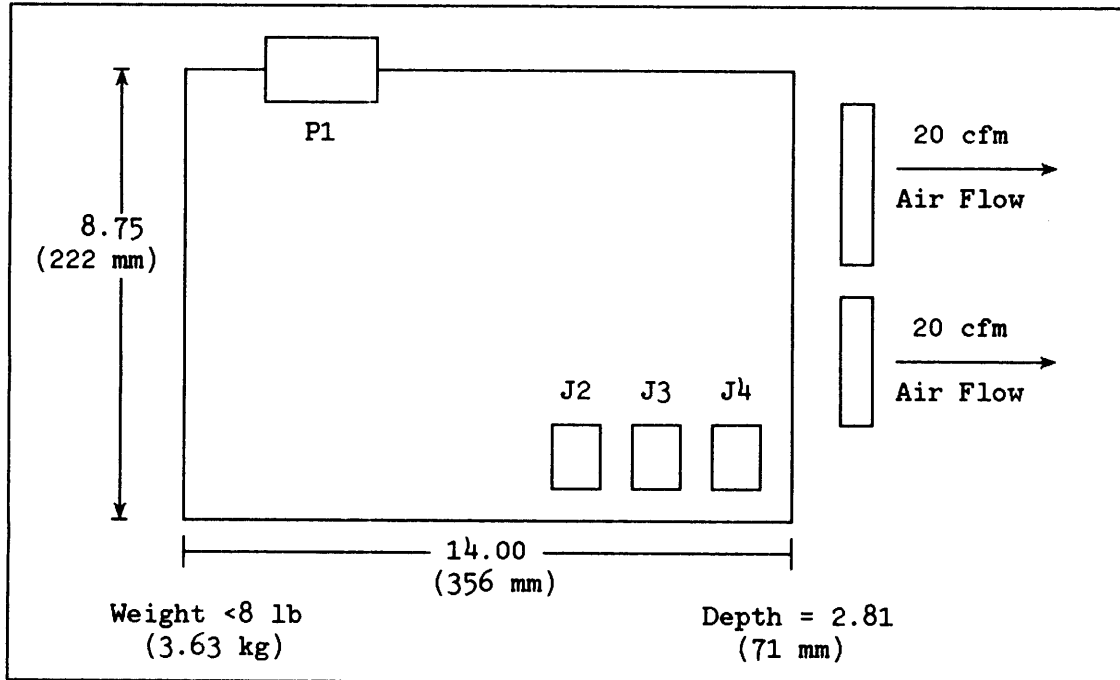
Dimensions and Connector Locations (300W Supply)
